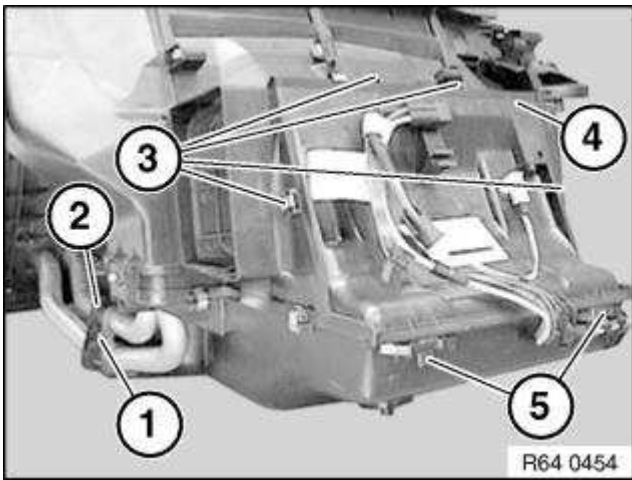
Release Screw (1) And Remove Bracket (2) From Double Pipe
